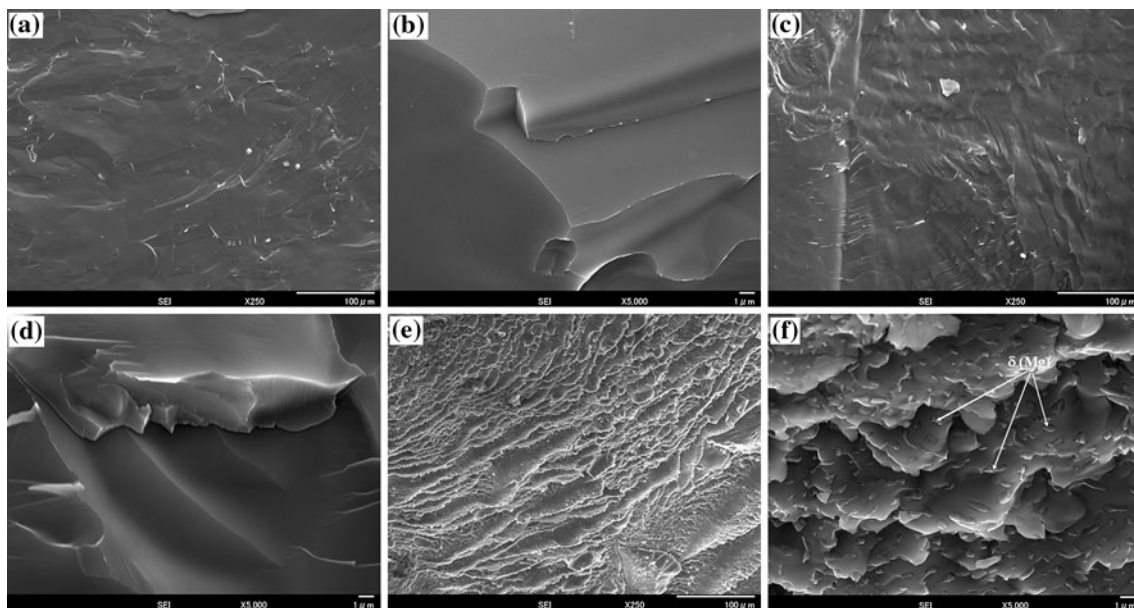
Fracture surfaces of different parts of the Al/Mg joint in the compound casting process; a, b bottom part, brittle fracture in the Al_3Mg_2 intermetallic compound, c, d middle part, brittle fracture in the Al_3Mg_2 intermetallic compound, and e, f top part, partly ductile fracture in the $(\text{Al}_{12}\text{Mg}_{17} + \delta)$ eutectic structure
